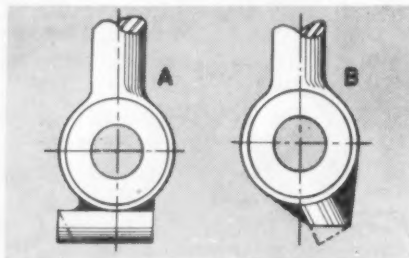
(A) Drawing showing how stop pin can be adapted to rod end or eye bolt having no built-in stop; (B) another design of stop pin for similar rod end or eye bolt.
